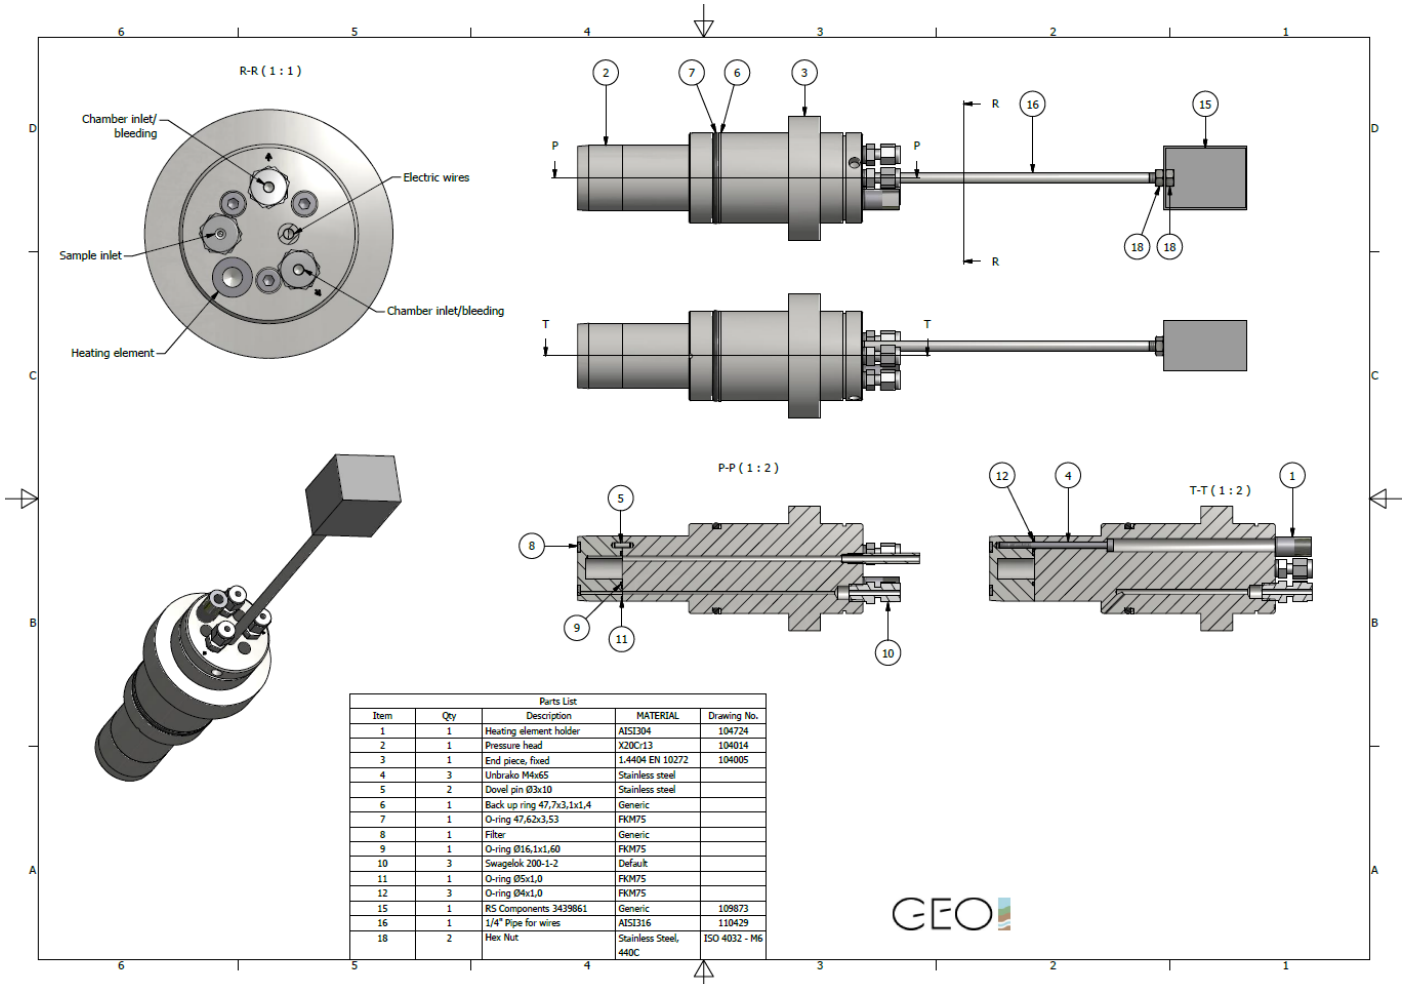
Engineering drawing of effluent head to the core holder. It includes the top view, the 3D structure and the different cross sectional view. The heating element and the electric connection to the oscilloscope are depicted in its top view.
